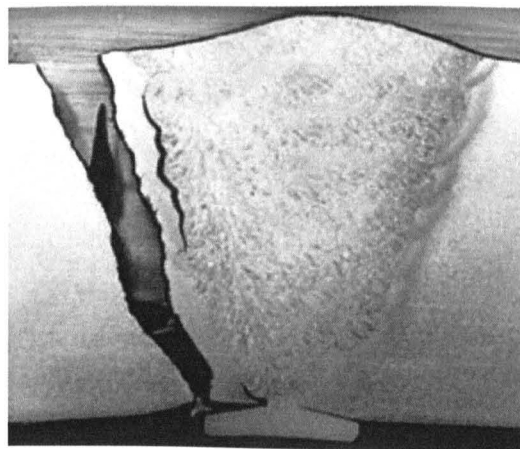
A typical Type IV cracking of a power plant pipe weld [22].
